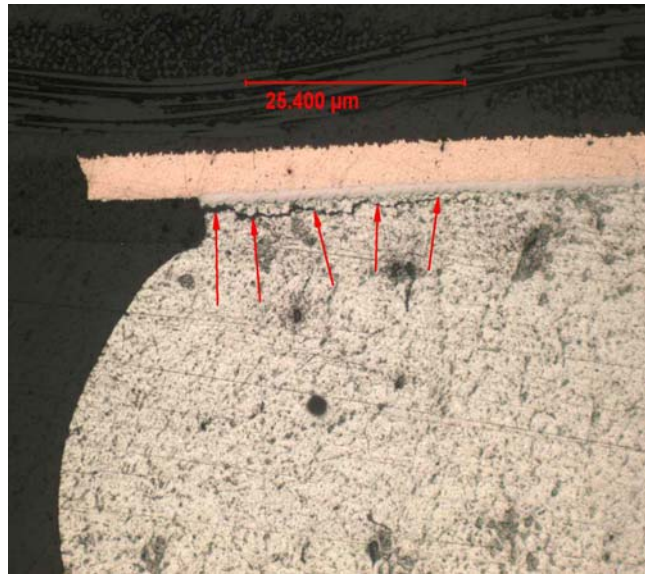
Board 97, SAC/SAC, BGA U44, PCB trace failure at BGA Ball 1B; As can be seen this failure could cause intermittent electrical failures
